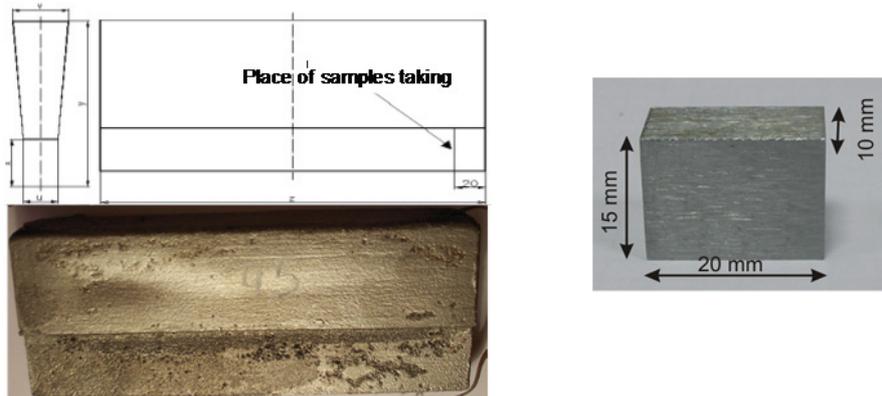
Drawing of casting with the sinkhead and the appearance of the finished casting
